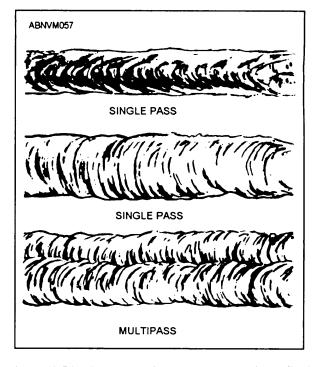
Acceptable single-pass and multipass GMA welds.
